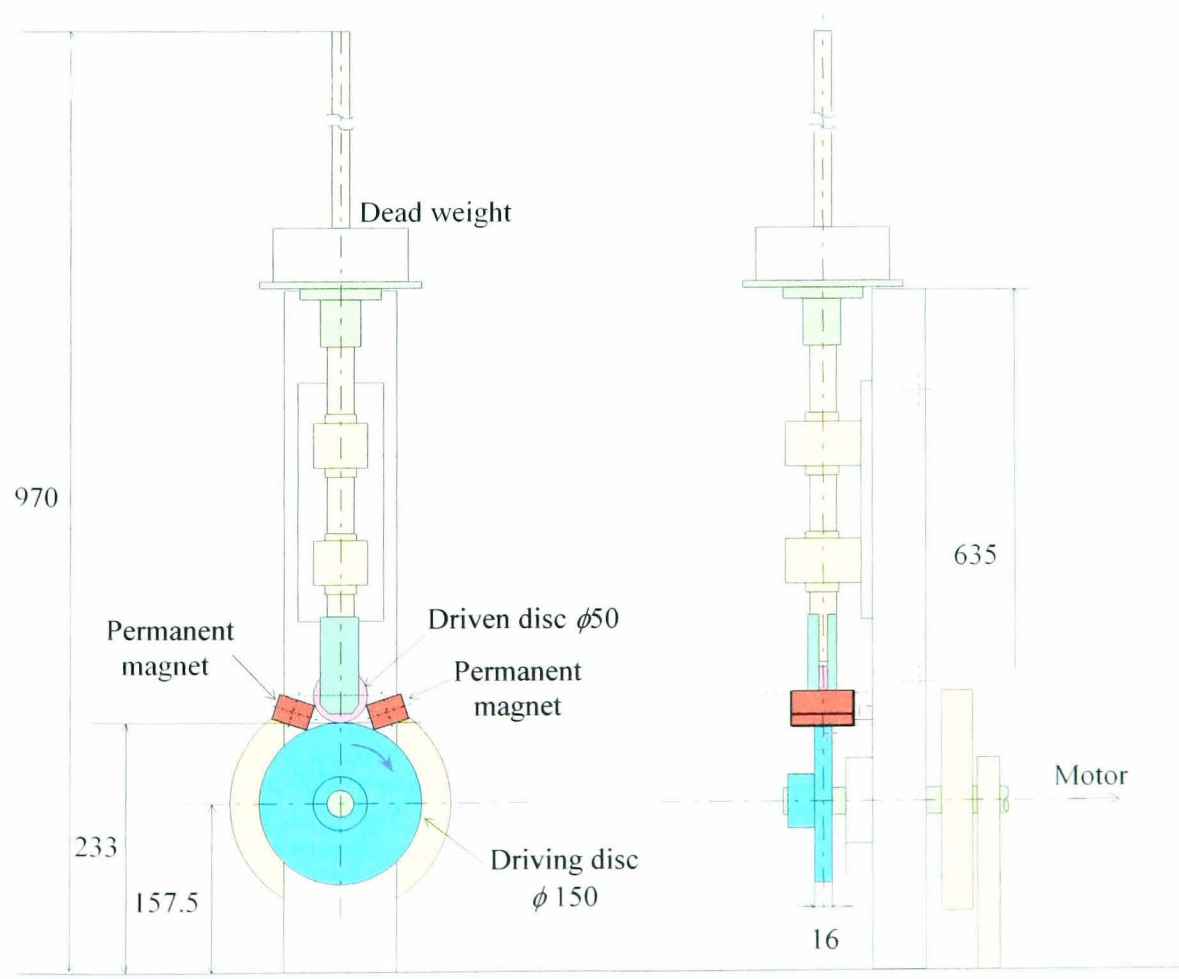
Dimensions of two-disc rolling contact test apparatus
